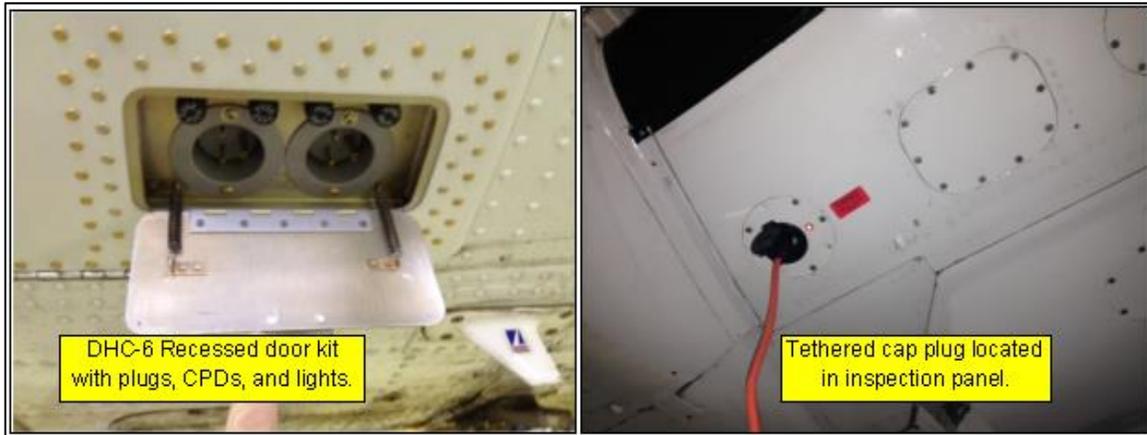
Examples of plug and light mounting. Left: Plugs in door kit with light and TU03141 CPD kits. Right: Flush plug with cap located in non-structural inspection panel. For additional plug mounting options refer to Installation Guide TNG1000.
